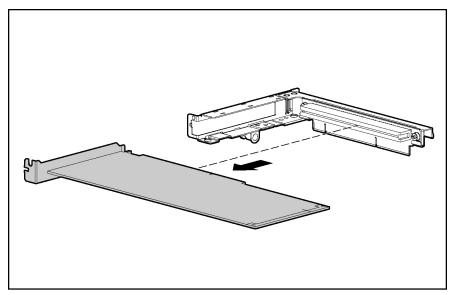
Removing an expansion board from the PCI riser board assembly
